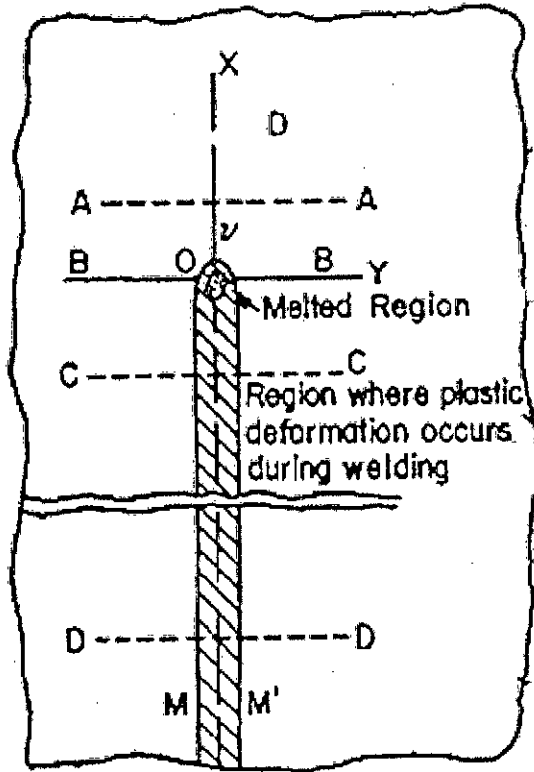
for Question 5. Changes in temperature and stresses during welding. Reprinted from Welding Handbook. Courtesy of American Welding Society.
